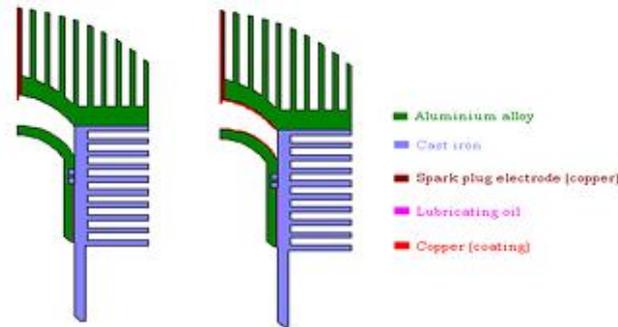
Configuration of the assembly of piston, liner and cylinder head for CE and CCE
